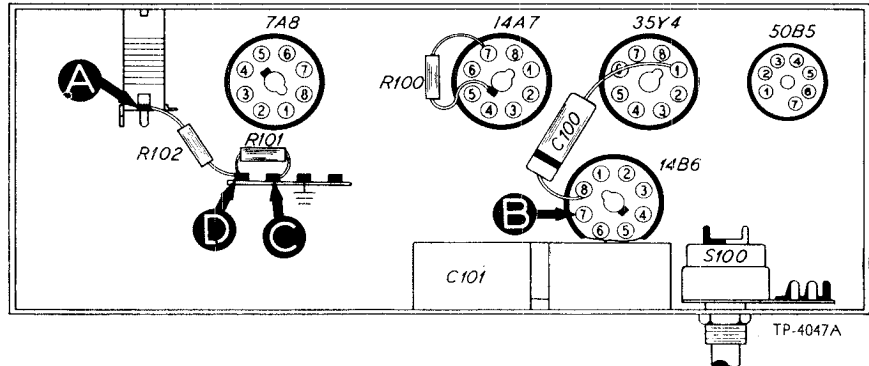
BOTTOM VIEW, SHOWING SECTION 1 TEST POINTS
